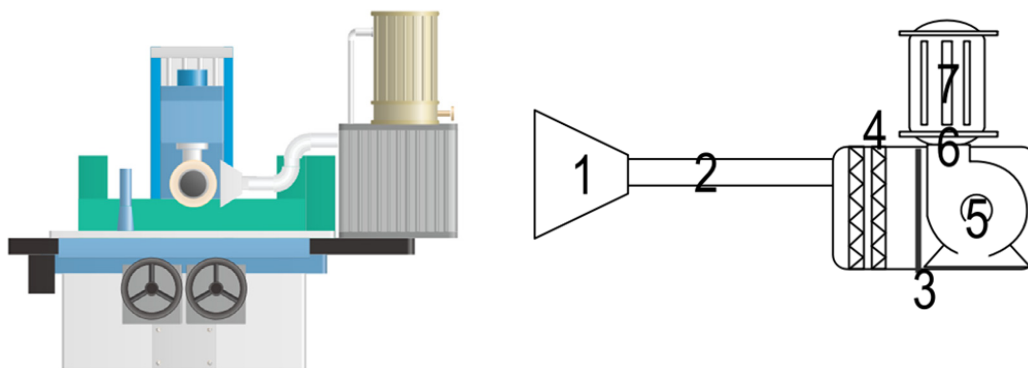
Schematic of the designed local exhaust ventilation system (1 - Local extraction hood, 2 - Flexible accordion duct, 3 - Filtration chamber, 4 - Aluminum filter, 5 - Centrifugal fan with radial blades, 6 - Tube sheet, and 7 - Cartridge filter containing a metal-organic framework nanofiber)
